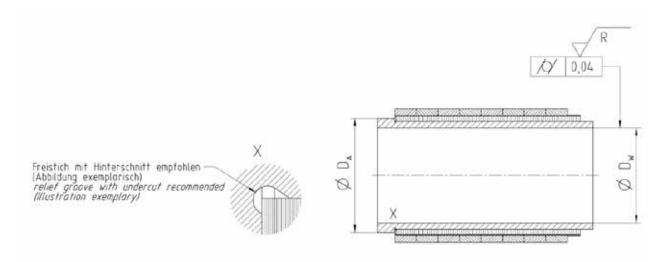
Recommended shaft dimensions for adhesive connections
